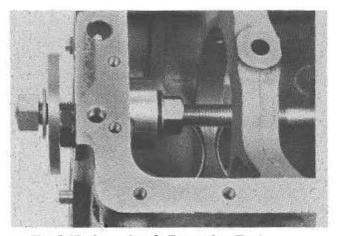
Insertion & Extraction Tool Assembled in Block for Gear End Main Bearing Insertion
